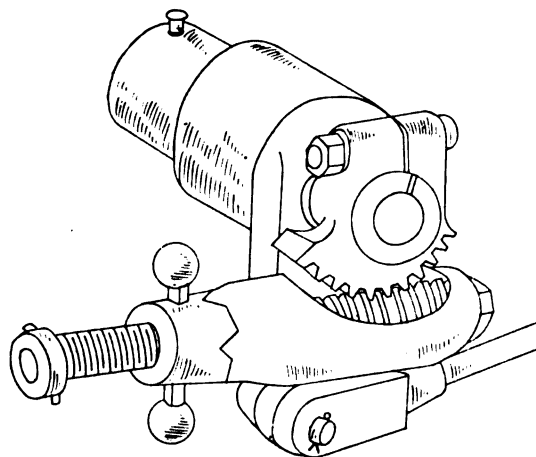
A FORM OF BRAKE ADJUSTMENT IN WHICH THE ANGULARITY OF THE CAMSHAFT IS CHANGED
